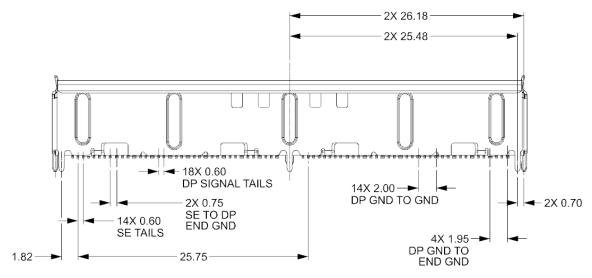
Dual-Bay Back View of Fixed-Side Connector Cage
